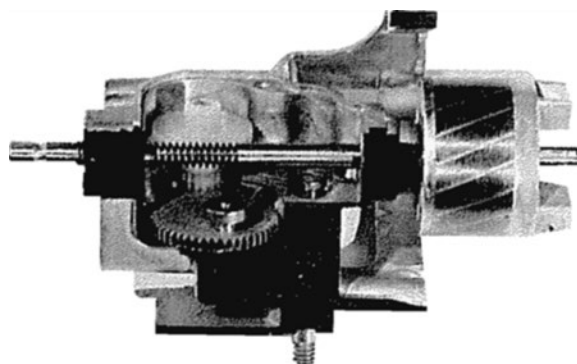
Crossed-helical gears in a small mechanism. The driver is steel and the driven gear is nylon.
